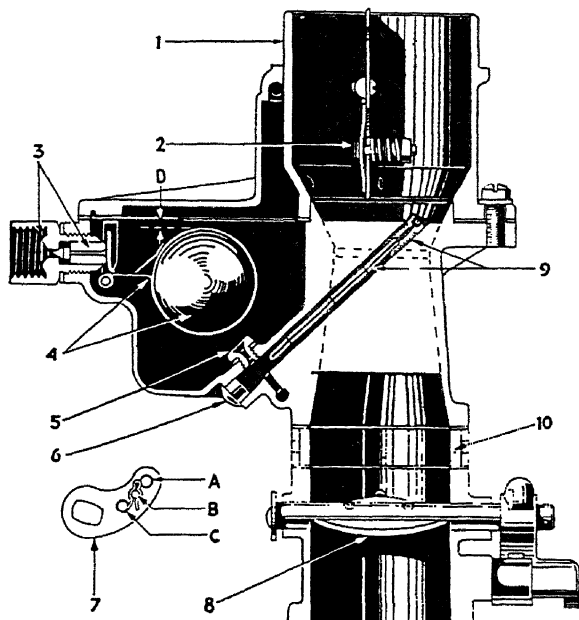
Side Sectional View of Chrysler Carburettor.
